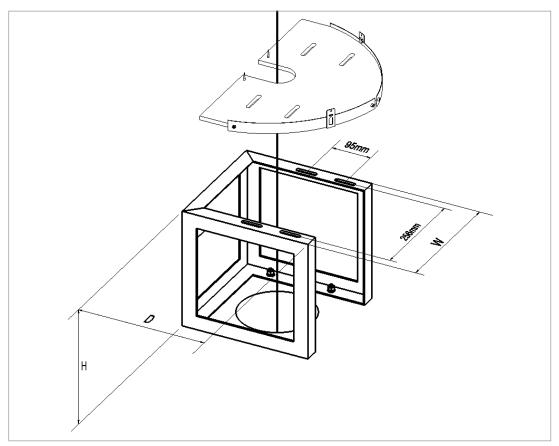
Key Dimensions of the Floor Mounting Bracket
